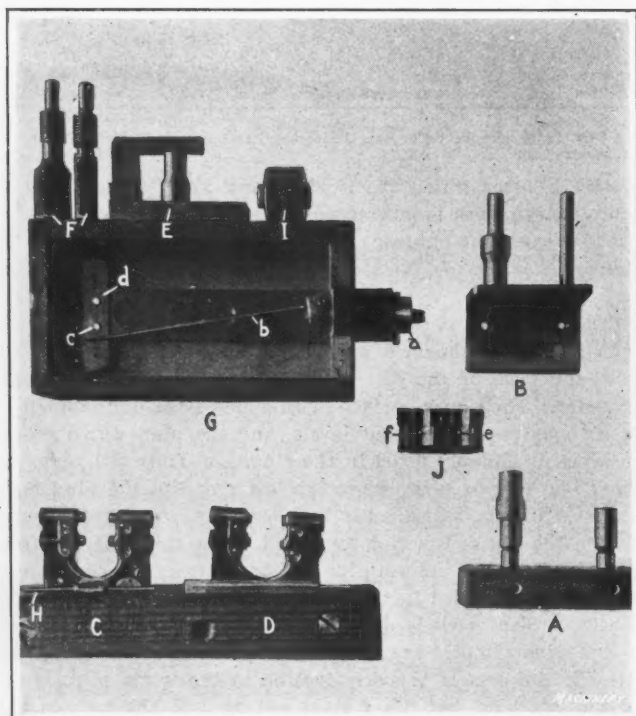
Complete Set of Gages used for checking All Dimensions of Fuse Cap
